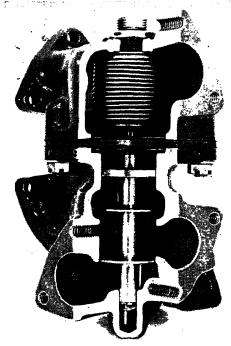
A cross-section of an oil-temperature regulator located on top of the oil radiator. (Courtesy of Eastern Air Lines, Inc.)
